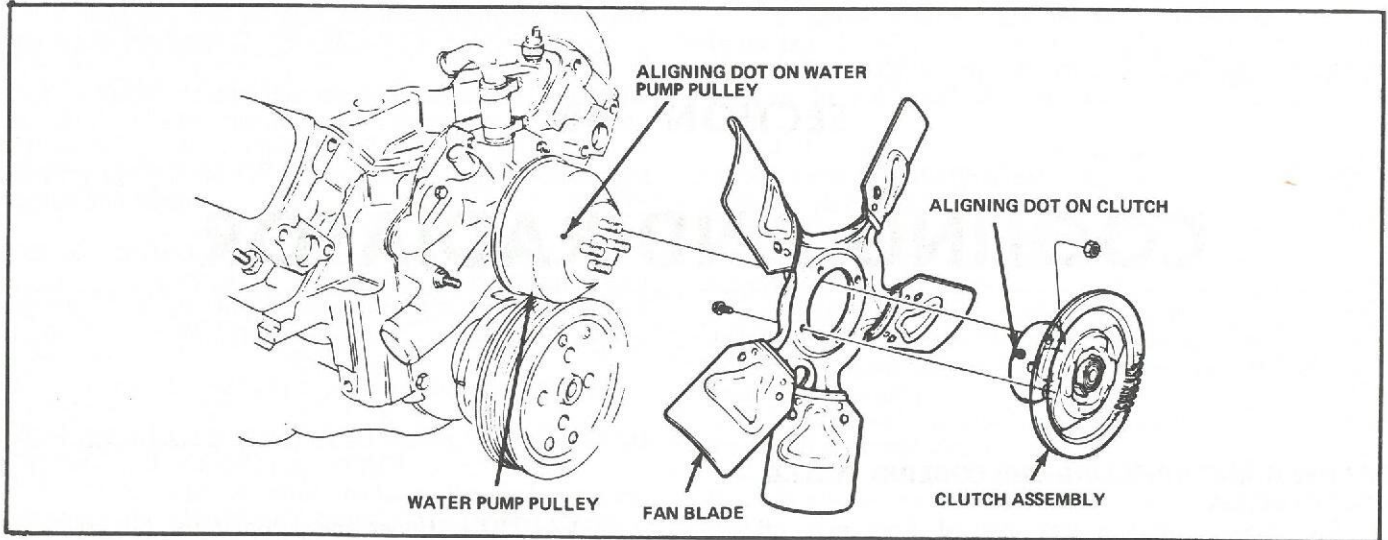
B-1 Engine Fan Clutch Installation – VIN V
